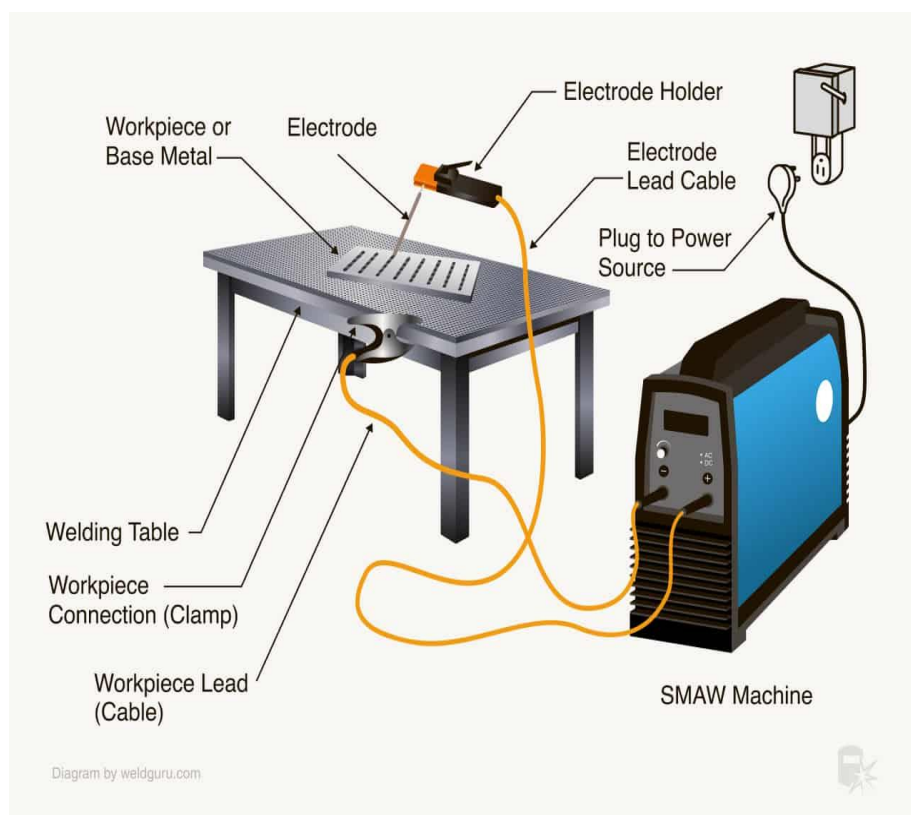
Schematic of SMAW welding technique [77].
